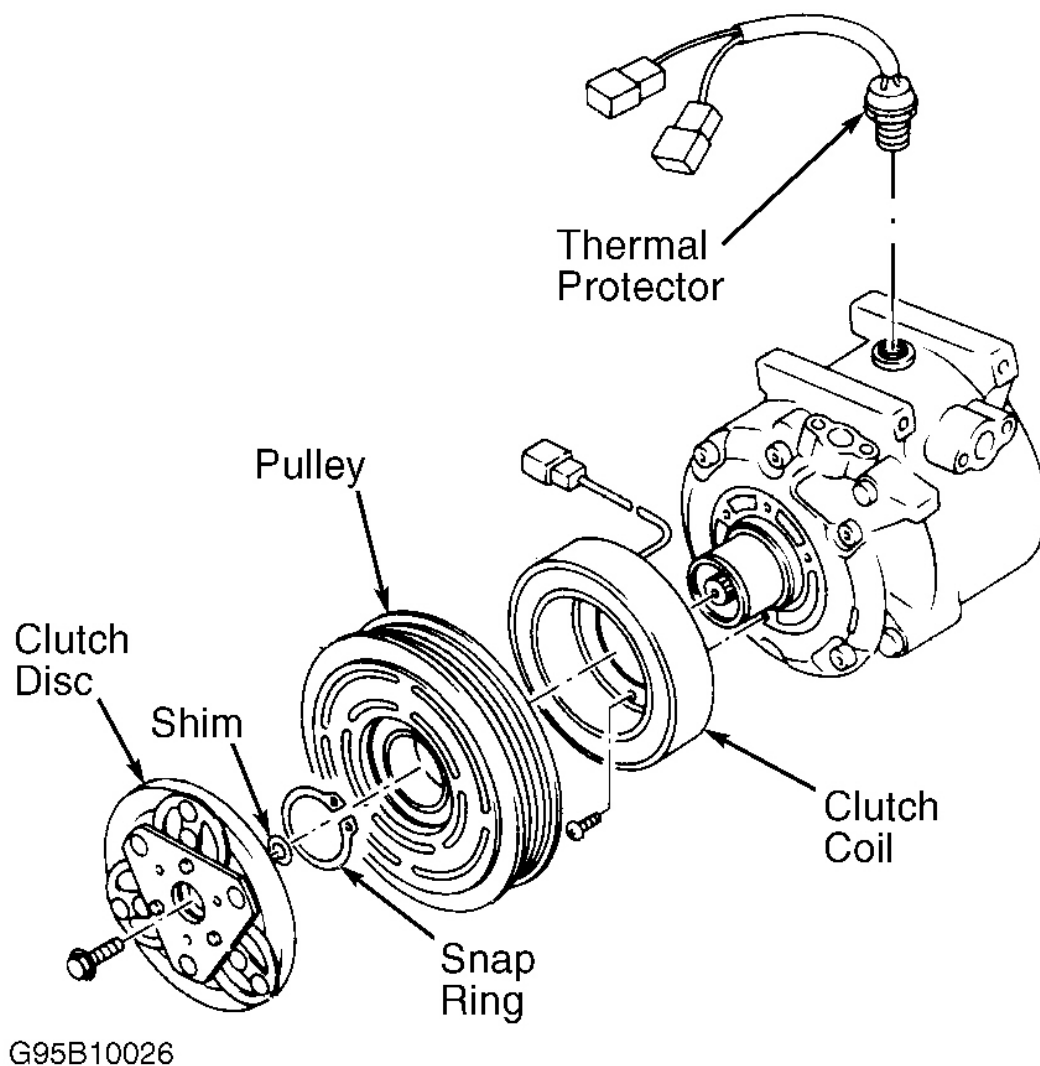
Exploded View Of Compressor (Zexel DKV-14C Rotary Vane)
